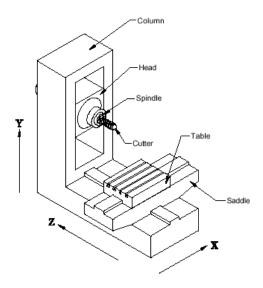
Three Axis Horizontal Machining Center (3 Linear Axes)
